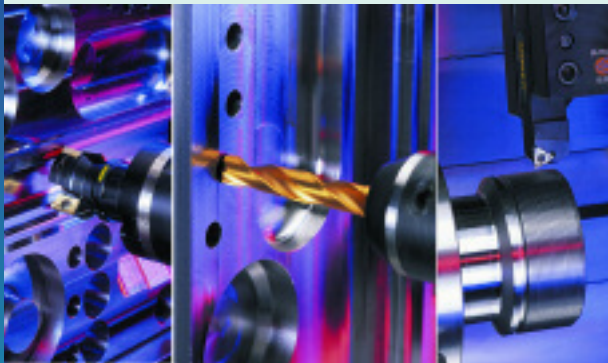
Cemented carbide tools are used for the machining the engine block of a car;
